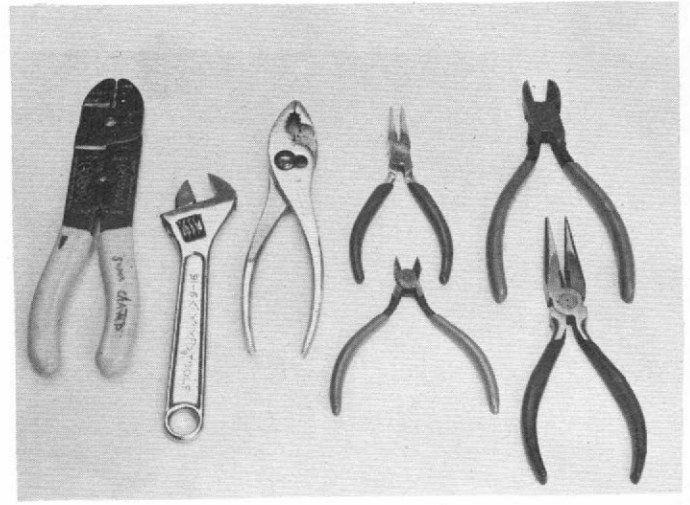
Shown here are (l-r) wire strippers, adjustable wrench, adjustable pliers, small set of diagonal cutters (dikes) and needle-nosed pliers, larger set of diagonal cutters and needle-nosed pliers.
